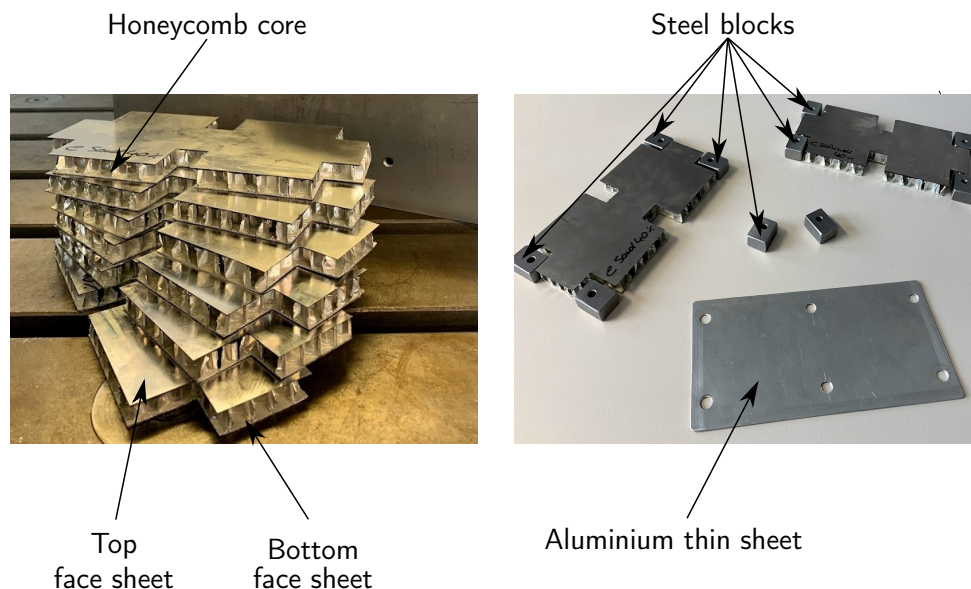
Left: Honeycomb damping plates (HCDPs) partially filled with granular materials. Right: steel blocks and thin aluminium sheet used for attaching HCDP to the WTS test specimen.
